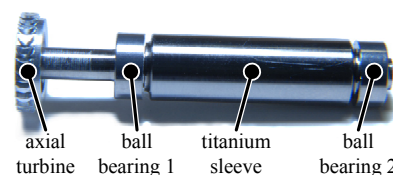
Impulse turbine and rotor with assembled high speed bearings.
